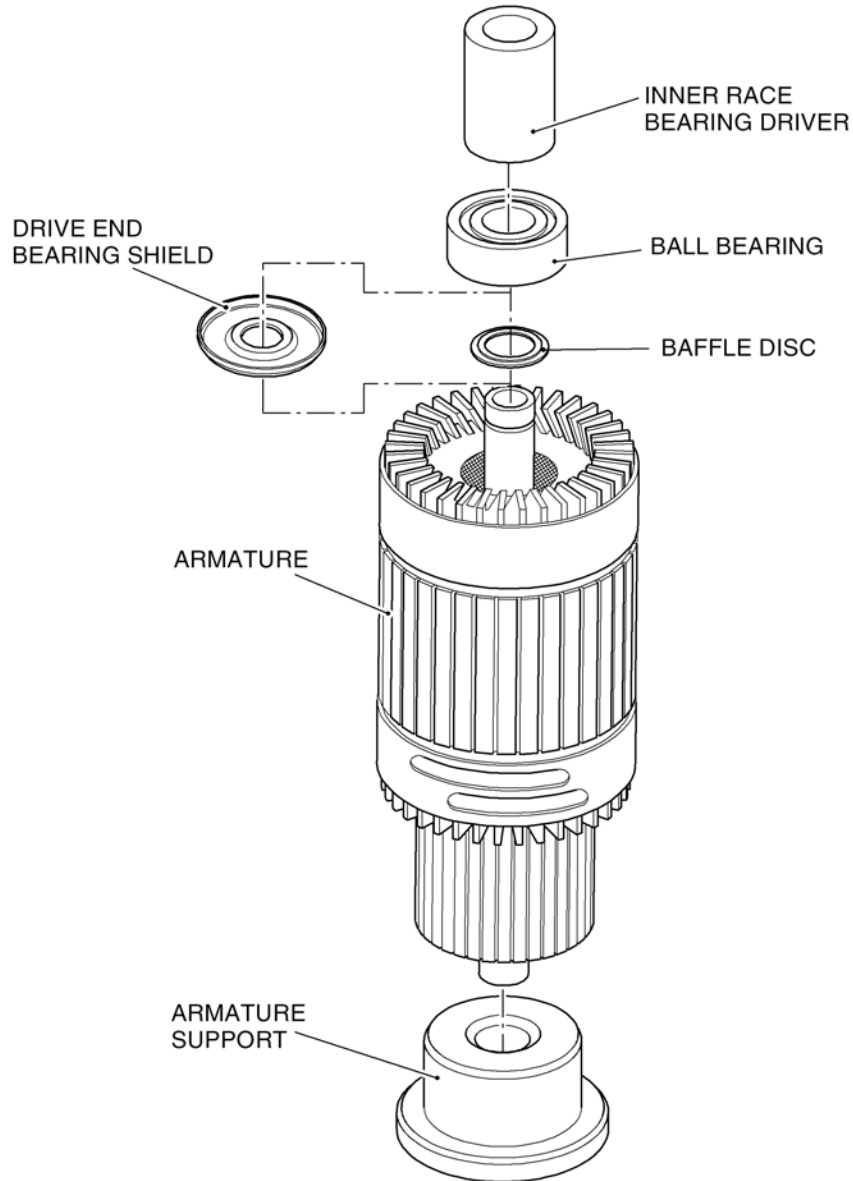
Baffle Disc or Bearing Shield and Ball Bearing Installation on Drive End of Armature Shaft.
